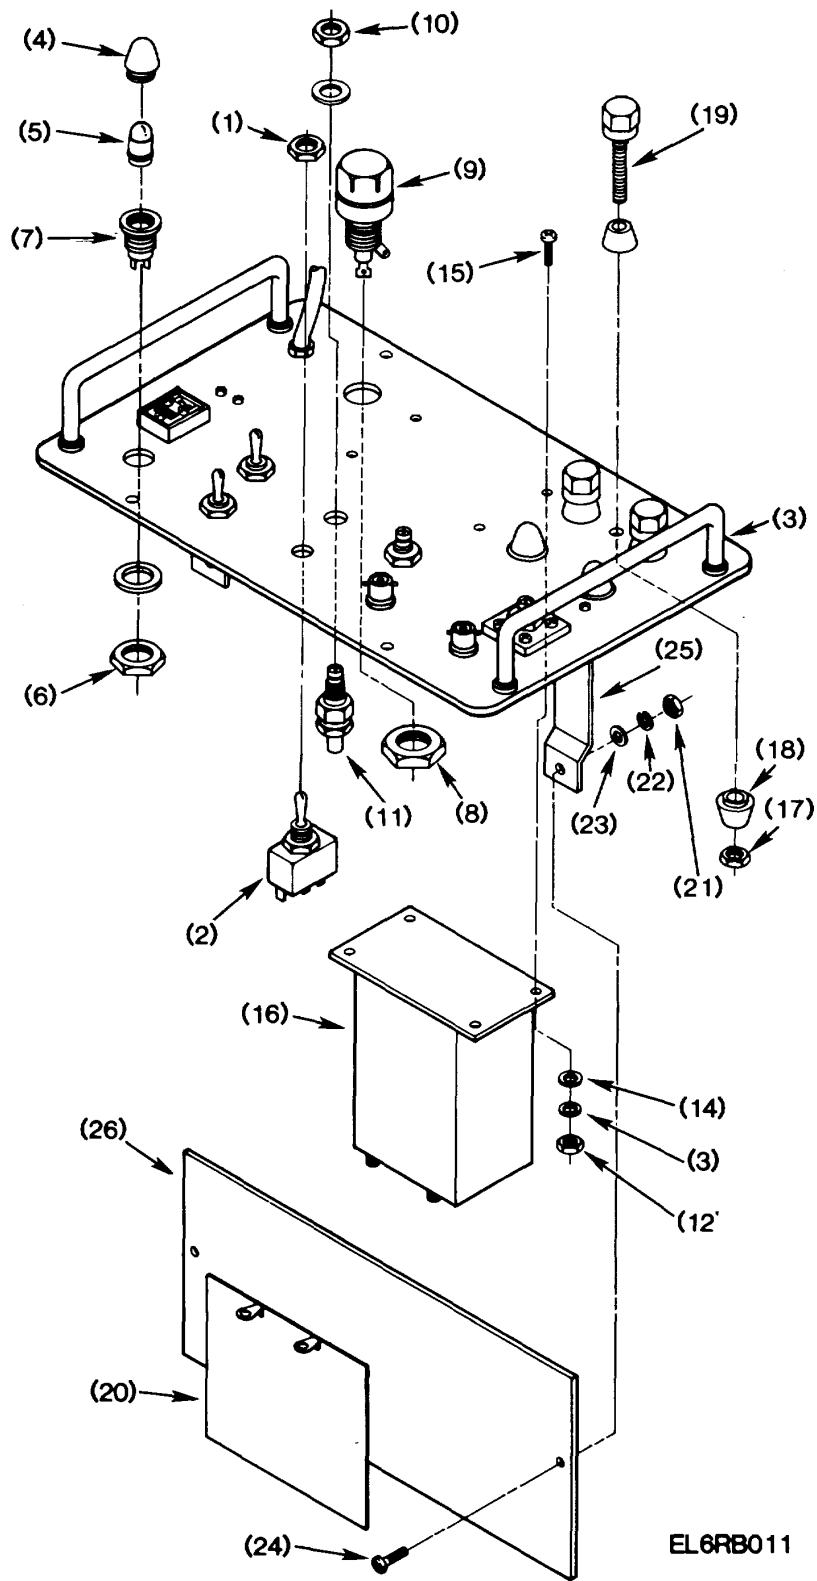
Exploded View of Test Set TS-3630/GRA-114.
